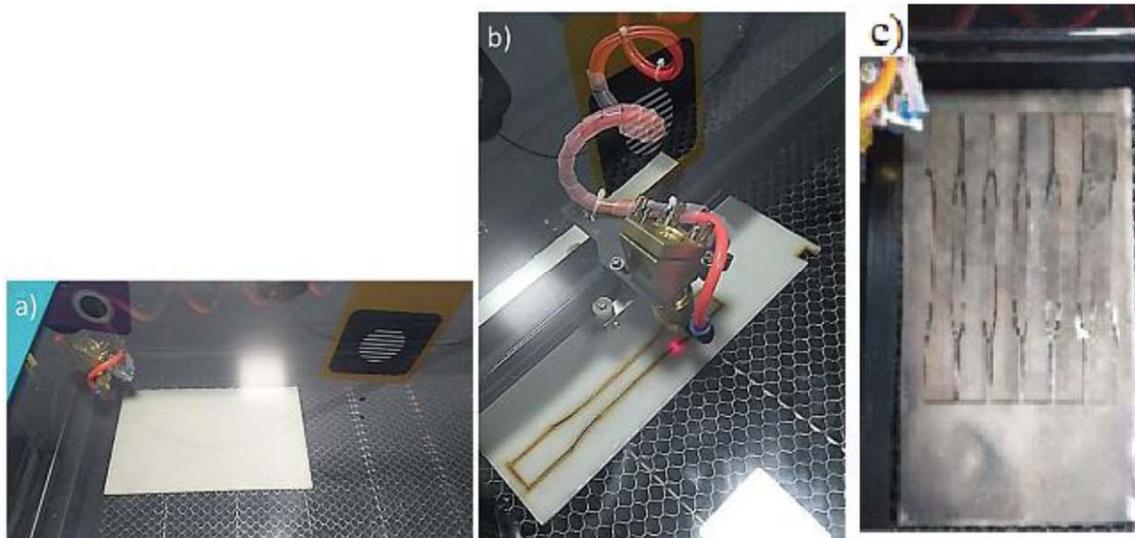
Laser cutting of the specimens: a) Positioning of the plate on the machine, b) Start of cutting the specimens, c) Finalization of the cut of the hybrid plate with jute.
